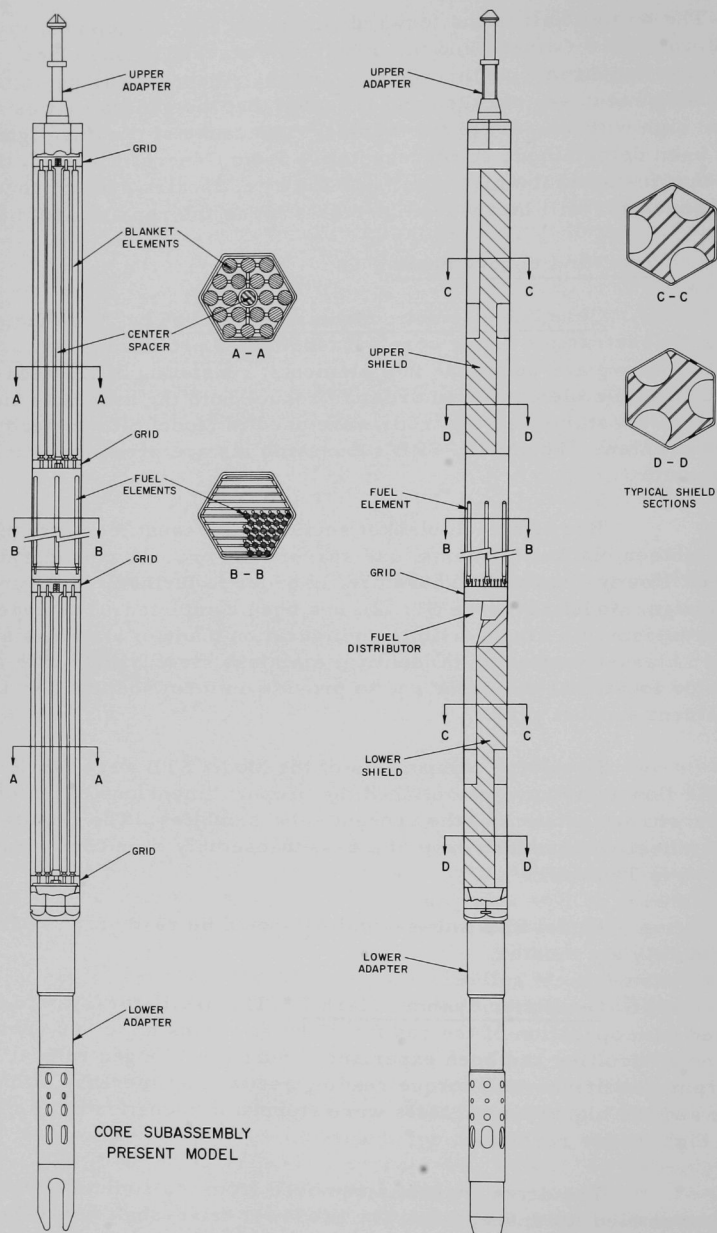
Core Subassembly--Model STB (Stainless Triflute Blanket)
